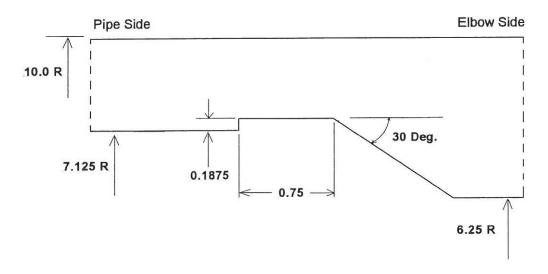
Geometric sketch of the "as built" pipe to elbow girth butt weld junction.
